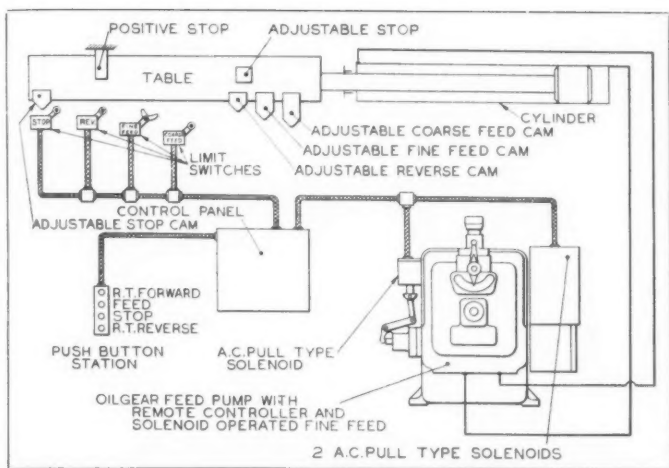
Diagram of Electric and Hydraulic Equipment Applied to Machine Tool with Two Feeds and Remote Control
